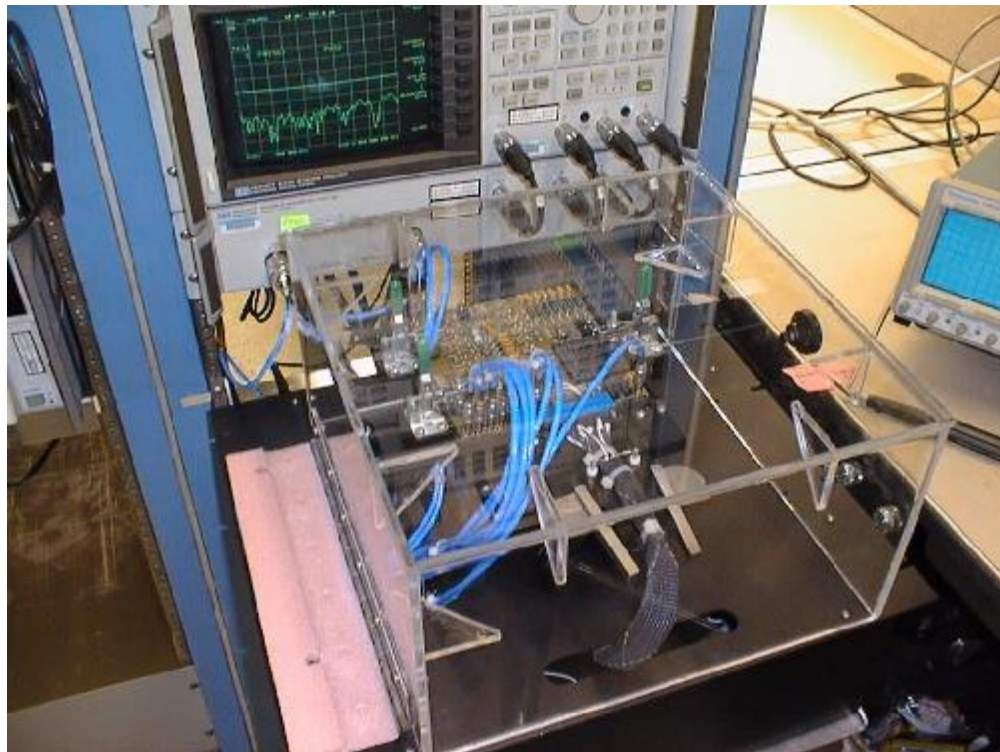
CCAMTF Automated Test Set PWA Test Fixture Assembly
